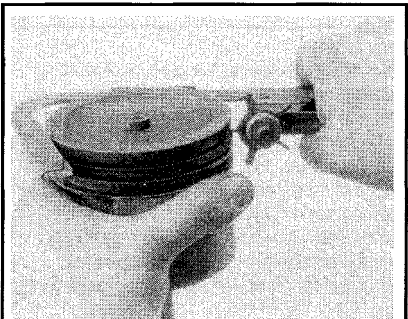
but a ring groove cleaning tool can be used, with care to prevent damaging the piston
